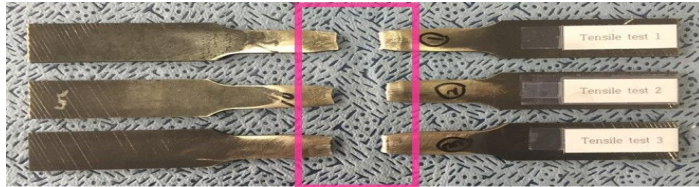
Fractured specimen after High Mn steel tensile test (3mm)
